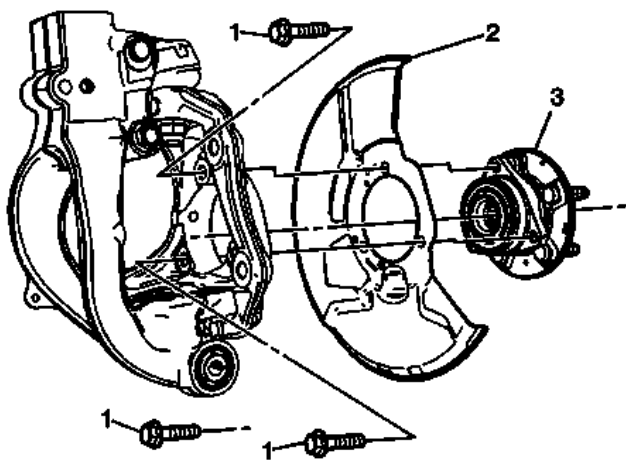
Front Wheel Bearing And Hub Assembly, Front Brake Shield & Bolts (GNB)
